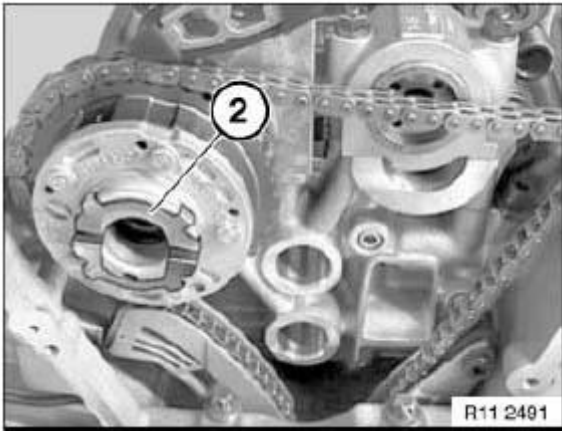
Identifying Exhaust Adjustment Unit Into Timing Chain
